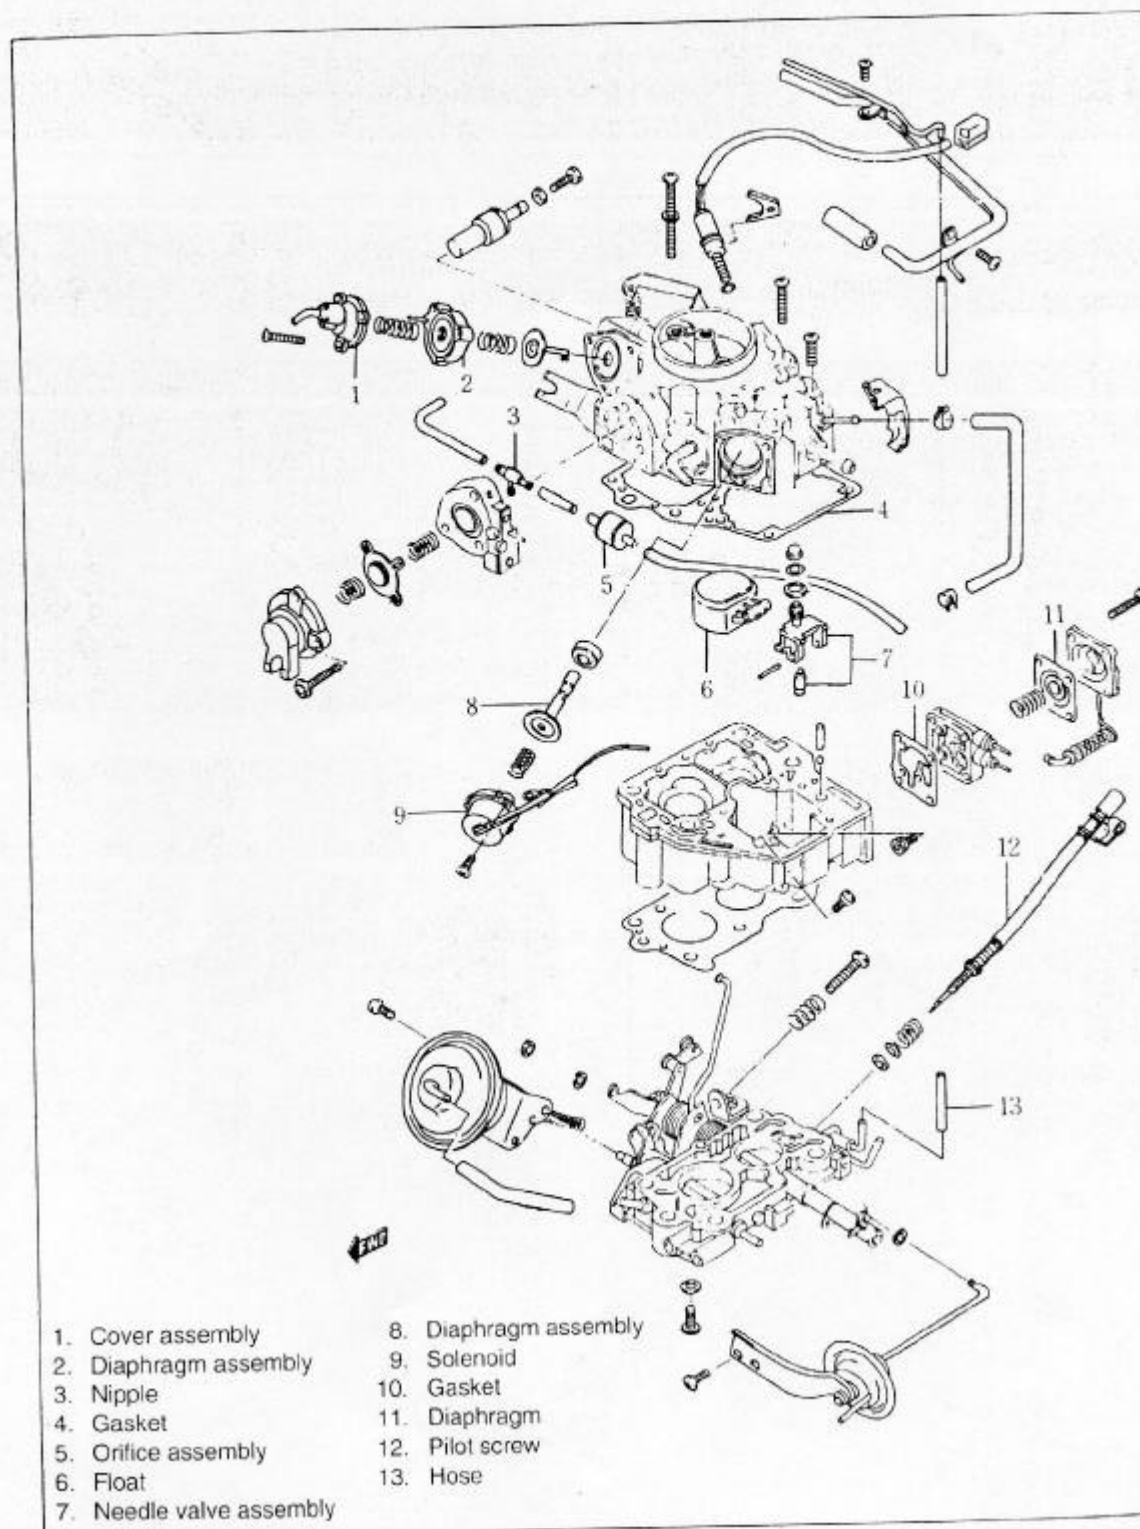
D - 27 COMPONENTS OF CARBURETOR
